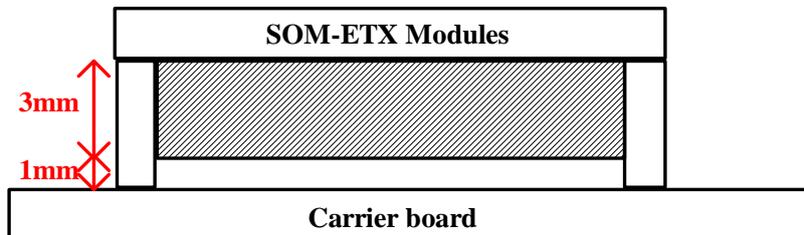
SOM-ETX Carrier Board Mechanical Dimensions
